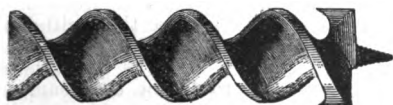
NO. 35—REGULAR BORING MACHINE AUGERS.
